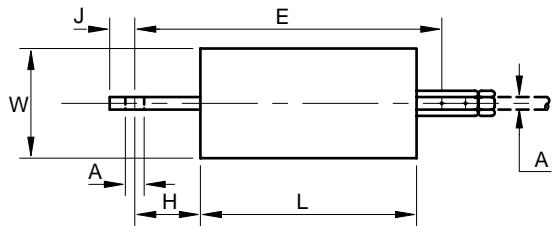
SINGLE ADJUSTMENT SWAY BRACE ASSEMBLY
